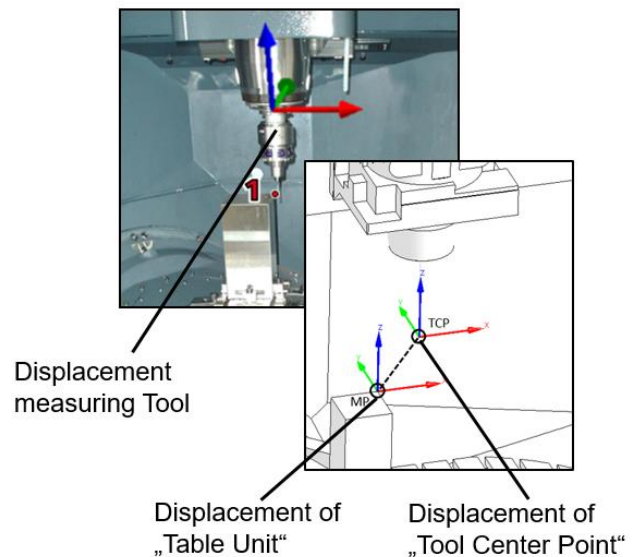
Relative displacement measurement between TCP and workpiece using a tool mounted touch probe
